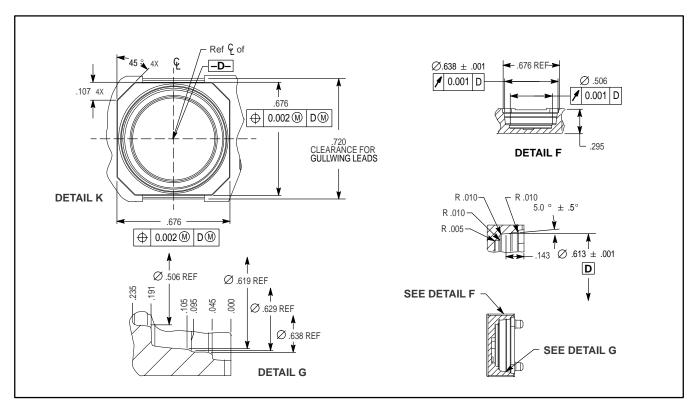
Dual Piston Fit Bottom Cavity Geometry
